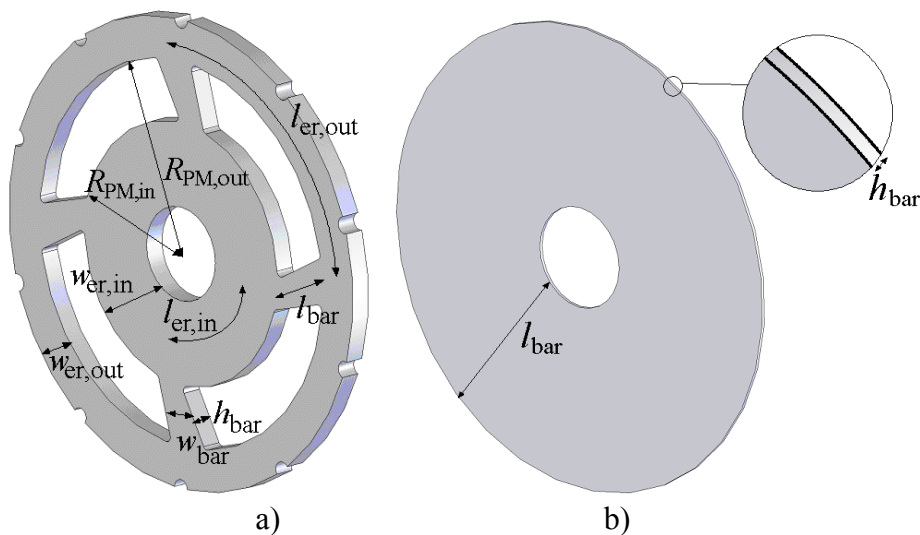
AFPMMSG1 aluminium damper winding construction. a) damper bars. b) conducting surface plate.
